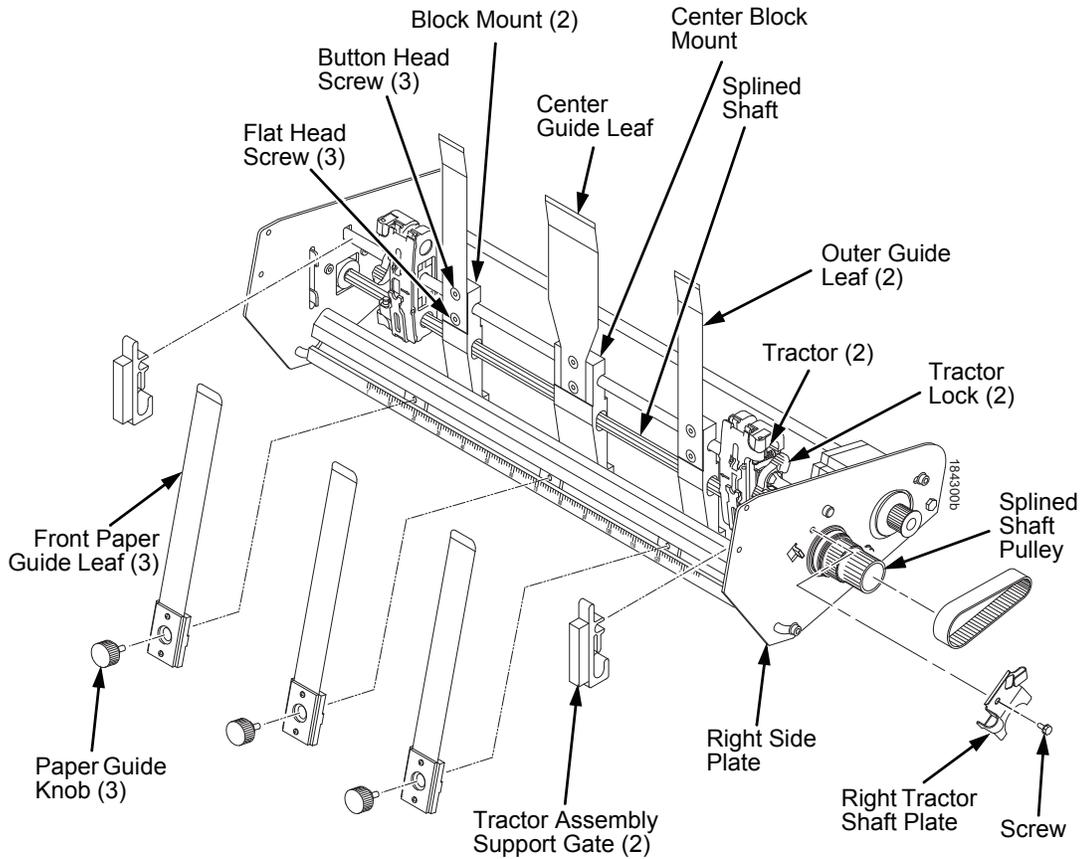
Removing the Paper Leaf Guides and Tractor Assembly Support Gates
